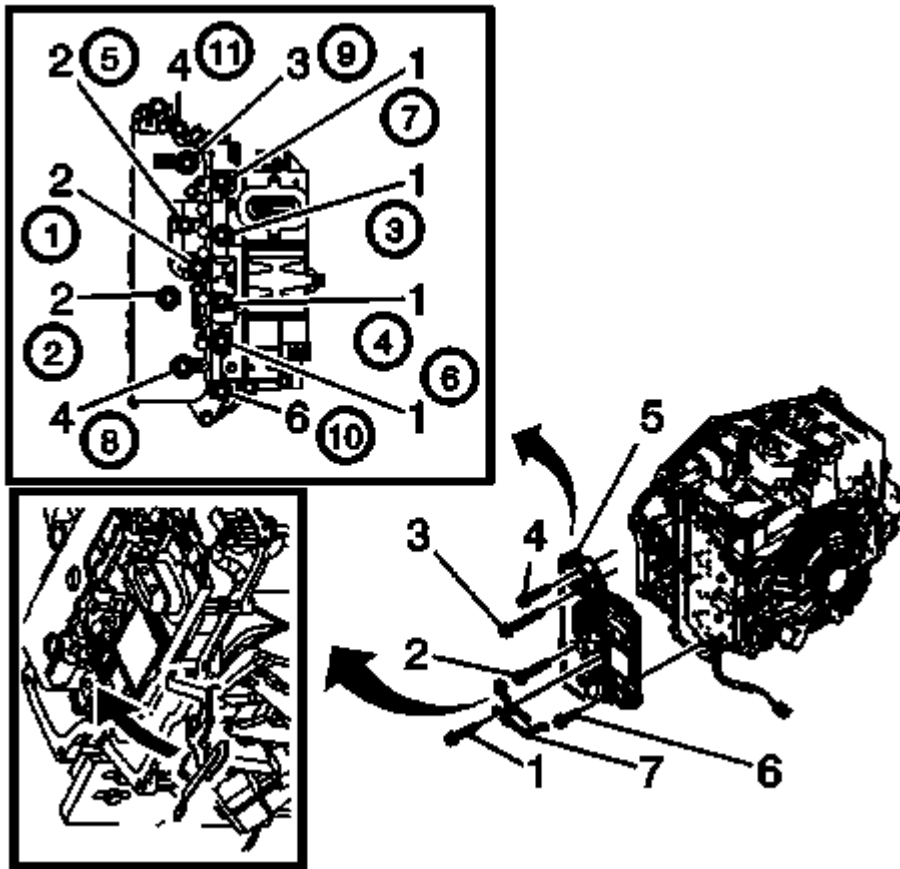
Identifying Control Valve Body Bolts Torque Sequence
